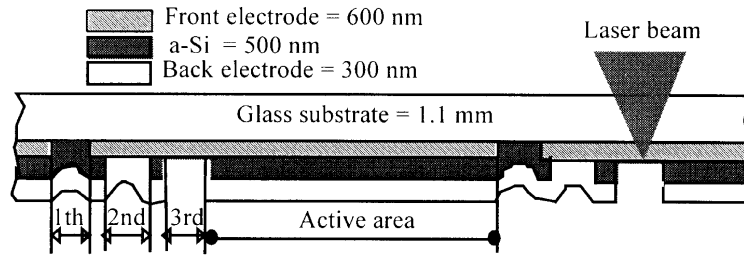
Back-scribing technique applied to the fabrication of a-Si integrated modules.
